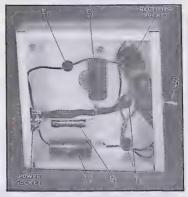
Bottom view of the oscillator-amplifier transmitter power supply.
